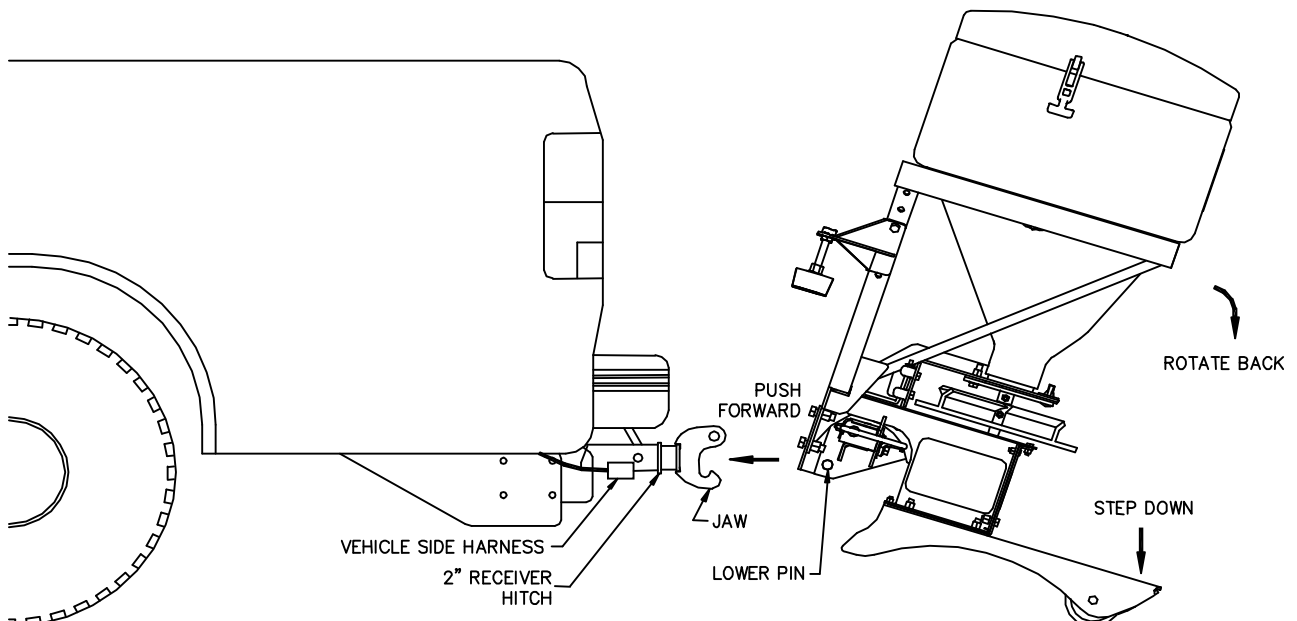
Spreader Attachment (RT3 Option Kit Installed)
